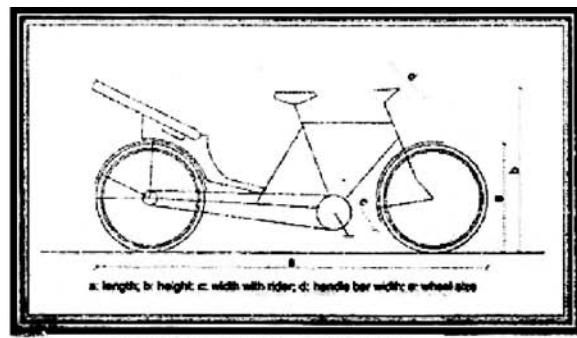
Vehicle dimensions for Passenger Rickshaw
